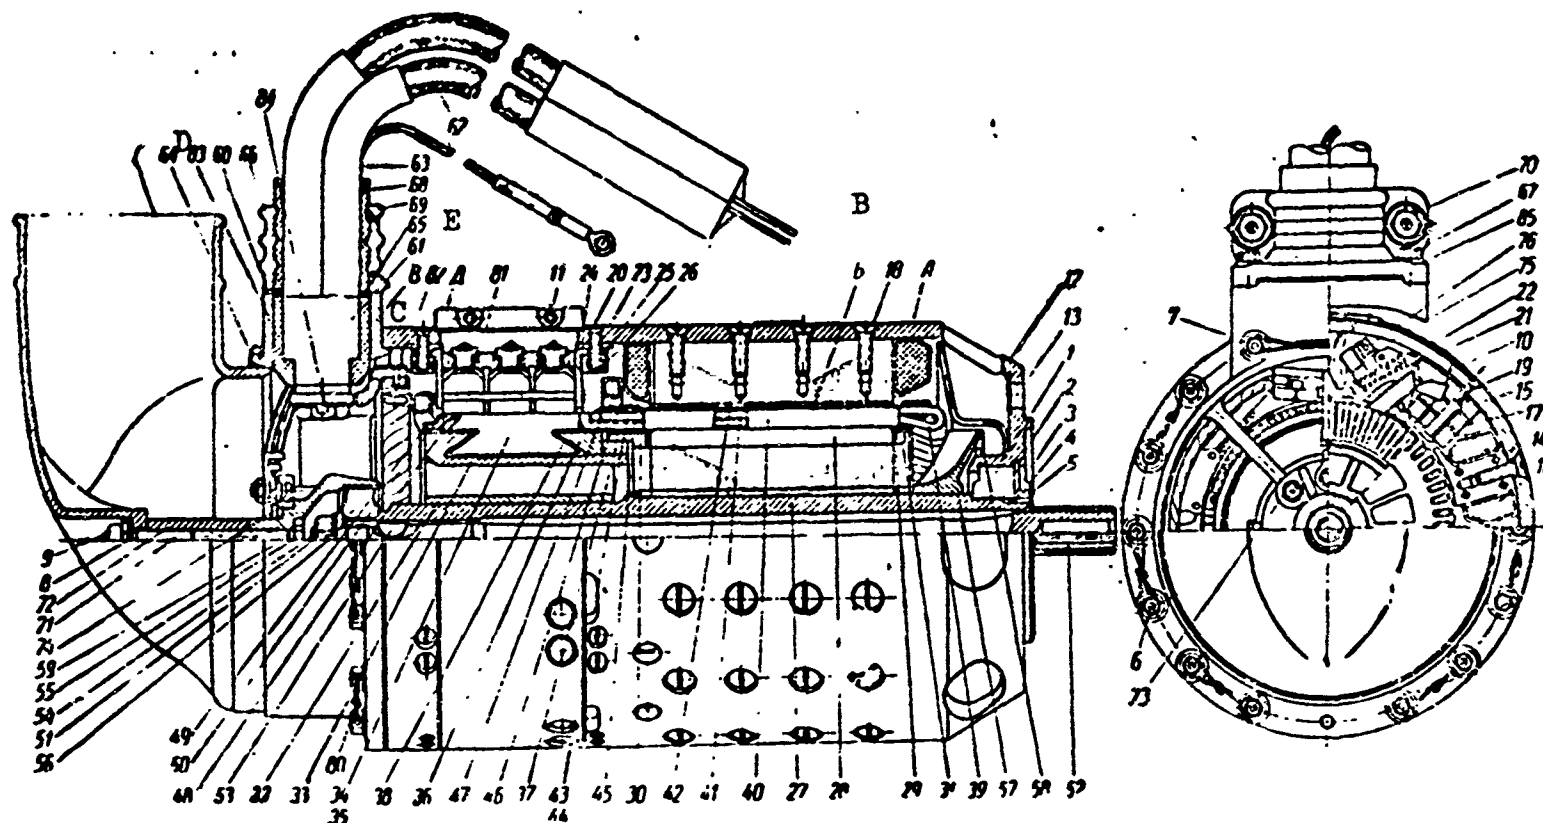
Construction of 18-kw generator. A) Housing with poles, windings, and brushholders; B) armature (with winding and commutator); C) housing with terminal leads; D) intake; E) protective strip. 1) No. 140806 ball bearing; 2) snap ring; 3) spacer; 4) locking tab; 5) special nut; 6 and 7) bolts; 8) washer; 9) self-locking washer; 10) brushes (unit); 11) screw; 12) frame; 13) protective grill; 14) main pole; 15) commutating pole; 16) field winding; 17) commutating-pole windings; 18) screw; 19) diamagnetic insert; 20) brushholder; 21) cylindrical coil spring; 22) lever; 23) screw; 24) insulating insert; 25) insulating sleeve; 26) nut; 27) hollow shaft; 28) steel assembly; 29) insulating sheet; 30 and 31) backup washers; 32) spider; 33) commutator sleeve; 34) commutator segment; 35) insulating insert; 36) backup washer; 37) nut; 38) insulating cone; 39) armature winding; 40 and 41) inserts; 42) wedge; 43) mica strip; 44) insulation; 45) insert; 46) insulation; 47) band; 48) copper pin; 49) equalizer ring; 50) insert; 51) No. 30804 ball bearing; 52) spring (shaft); 53) key; 54) washer; 55) nut; 56) locking tab; 57) fan; 58) brass disk; 59) guard; 60) plastic pad (block); 61) tip; 62) conductor; 63) vinyl tube; 64) shunt-winding lead; 65) rubber gasket; 66) nipple; 67) bolt; 68) sheet rubber; 69) clamp; 70 and 71) bolts; 72) sleeve; 73) screw; 74) terminal
